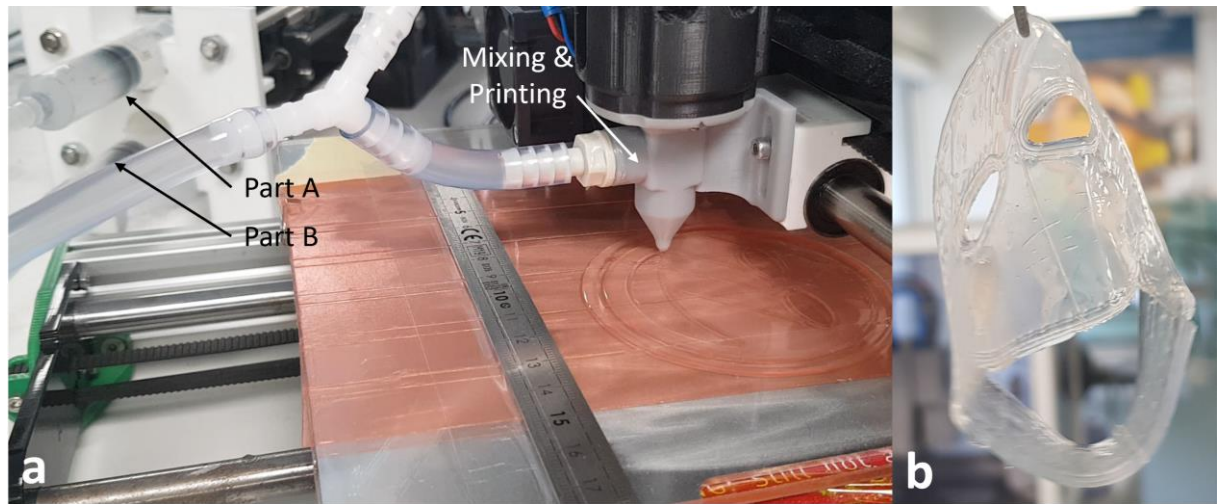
Printed smiley-face without premixing. a) printing to realize the structure. b) final result of automatic 3D printing of two-part elastomer.
